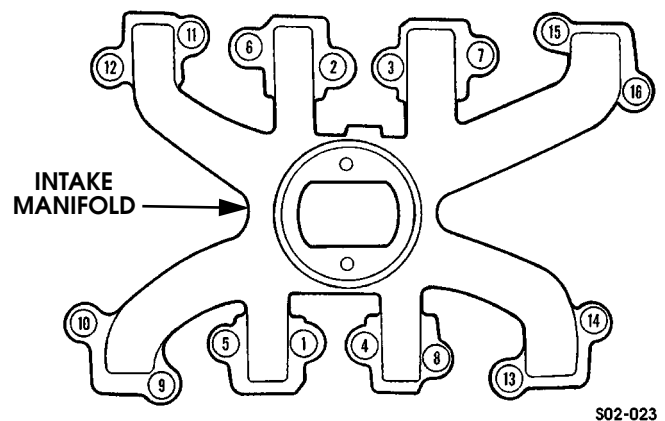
Manifold Bolt and Stud Tightening Sequence
